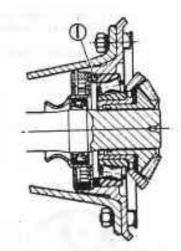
DIFFERENTIAL BEVEL ADJUSTING WASHER.
